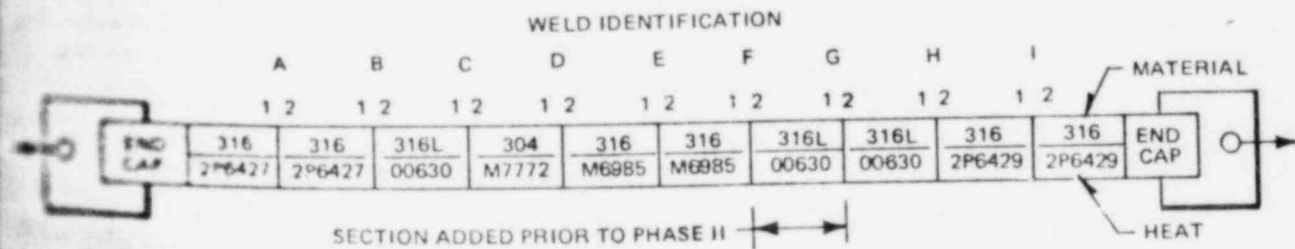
Test Weldment for Fourth Cyclic Tension Test in Large Environmental Fatigue Test Facility
